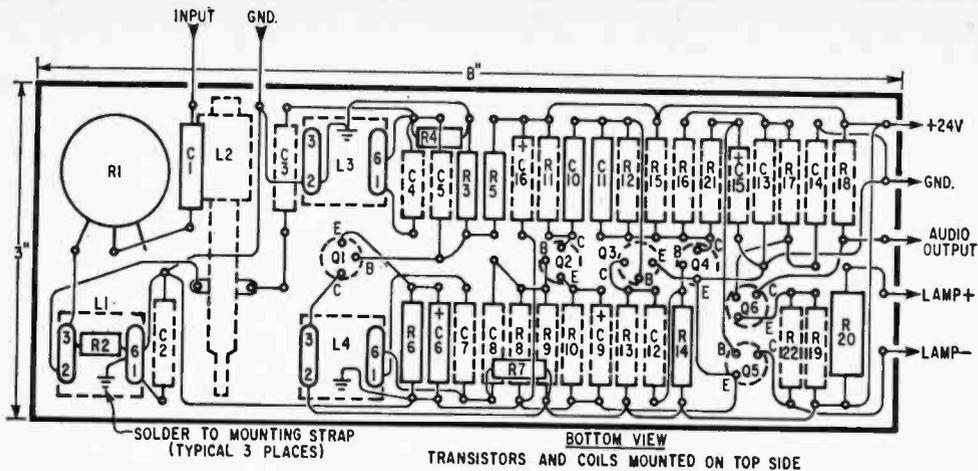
Detail layout of parts on circuit board. Dashed lines indicate parts under board.
